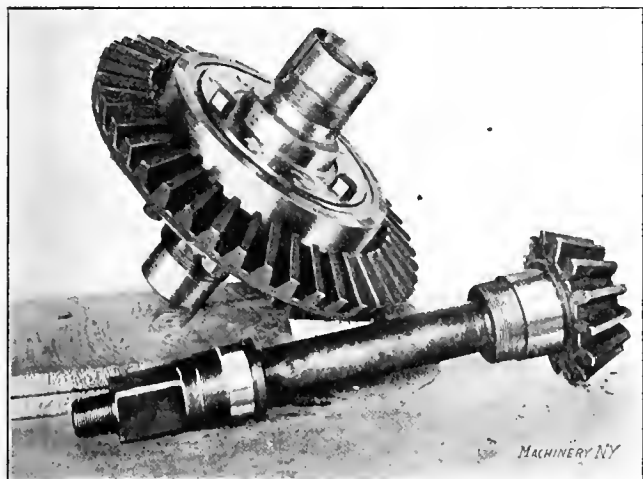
The Equalizing Gear Complete, with Bevel Gear and Pinion, as used in the Stevens-Duryea Automobile
